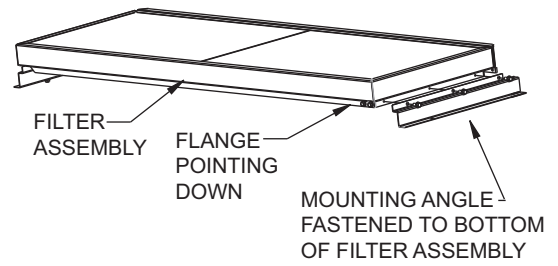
Correctly Assembled Bottom Filter Assembly, Sizes 020-035 Only
